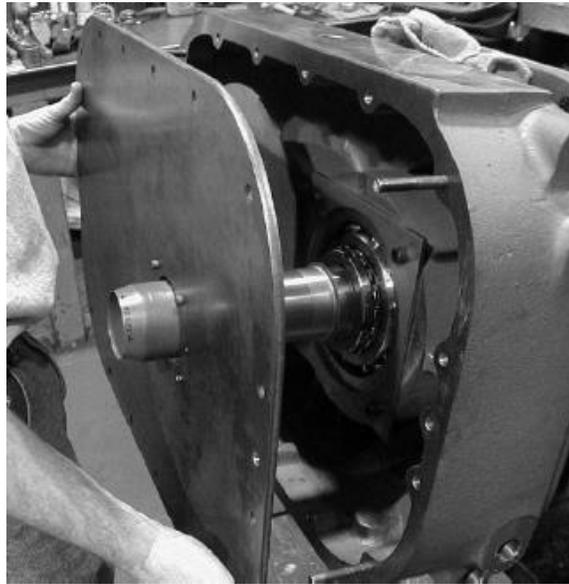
DISCHARGE END CLEARANCE CHECK
